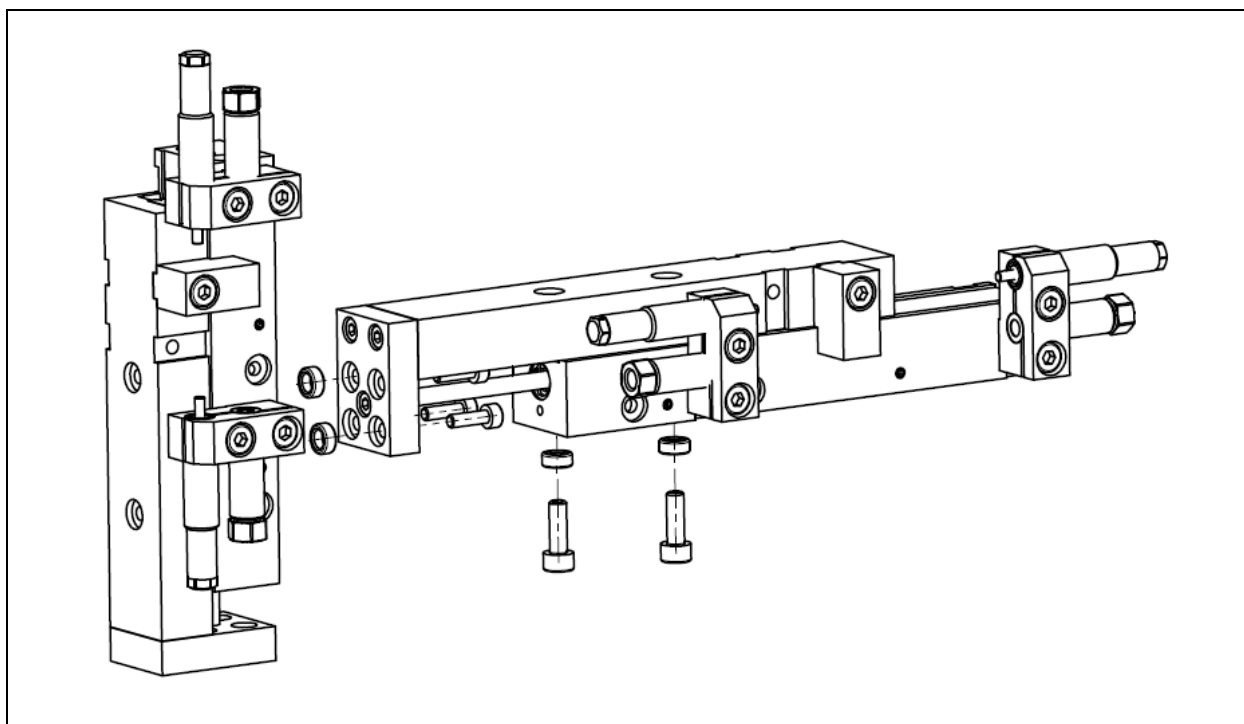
Mounting of superstructures using two linear units of the type LSM as example
